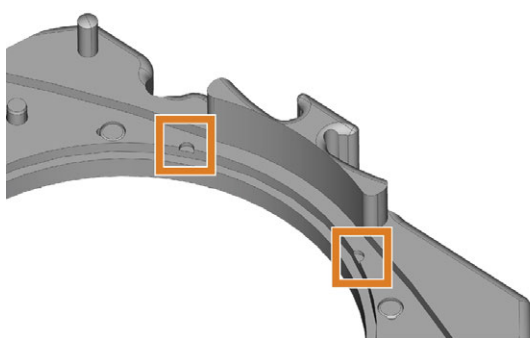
RECESSES (MARKED ORANGE) TO BE ALIGNED WITH MARKINGS FOR SAFER REMOUNTING
